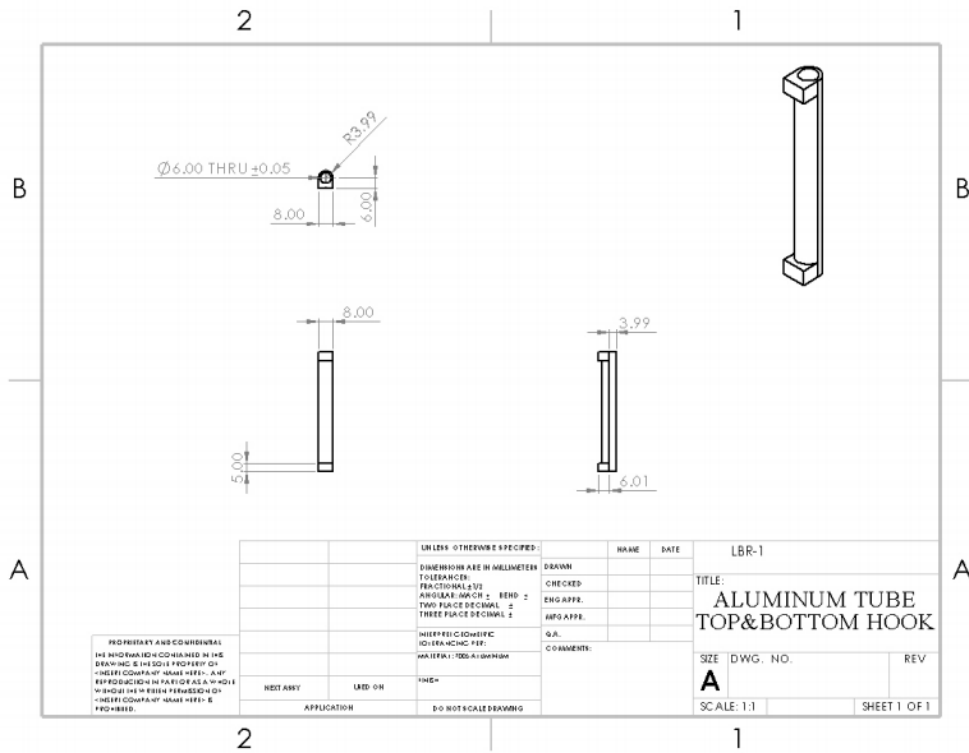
Part drawing of the aluminum tube for the lifting and climbing hooks
